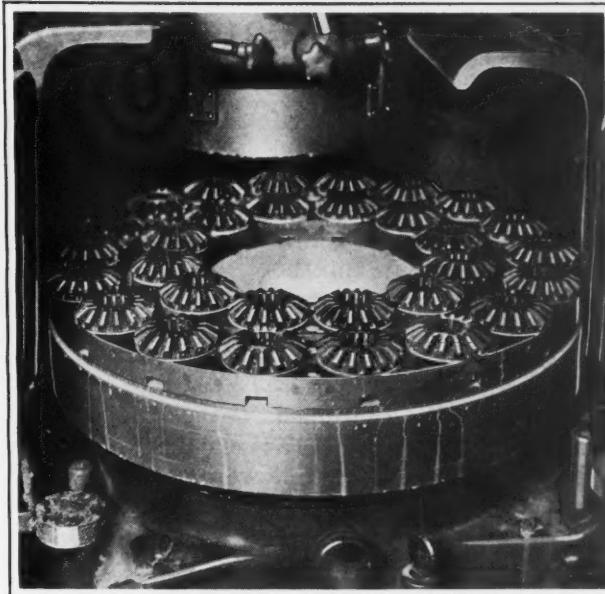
Magnetic Chuck Equipped for Holding Thirty Bevel Gears Having Projecting Hubs
